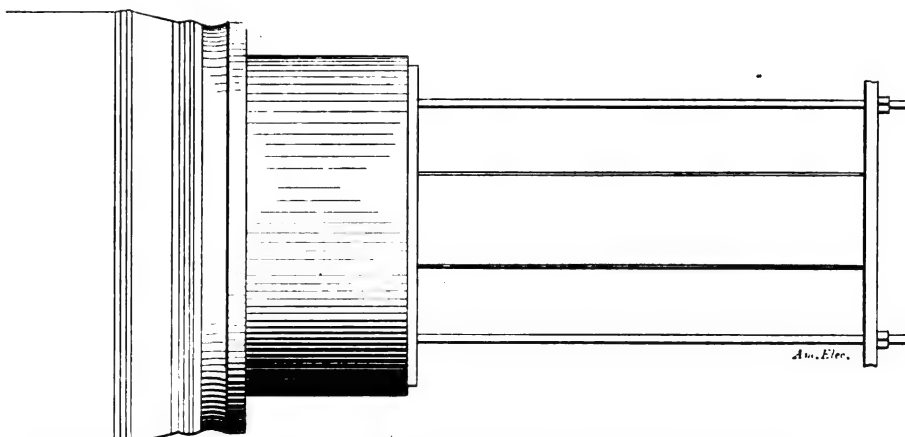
METHOD OF REMOVING END COMMUTATOR LOCKING RING.
